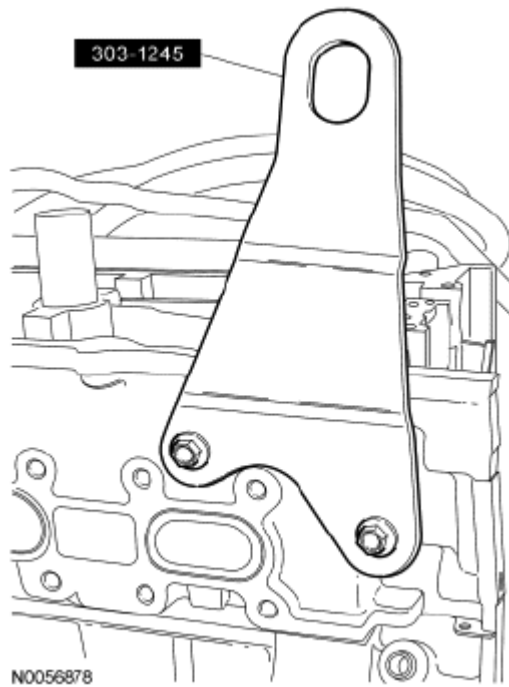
Installing Engine Lift Eye On LH Cylinder Head
